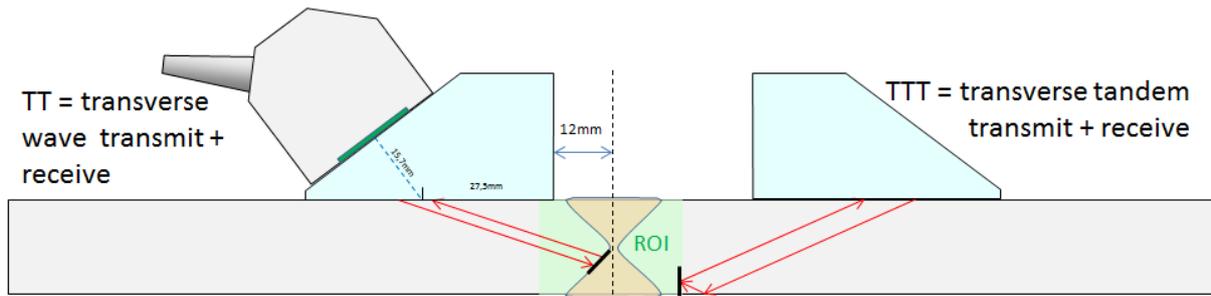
TT- and TTT-mode for TFM inspection of welds
